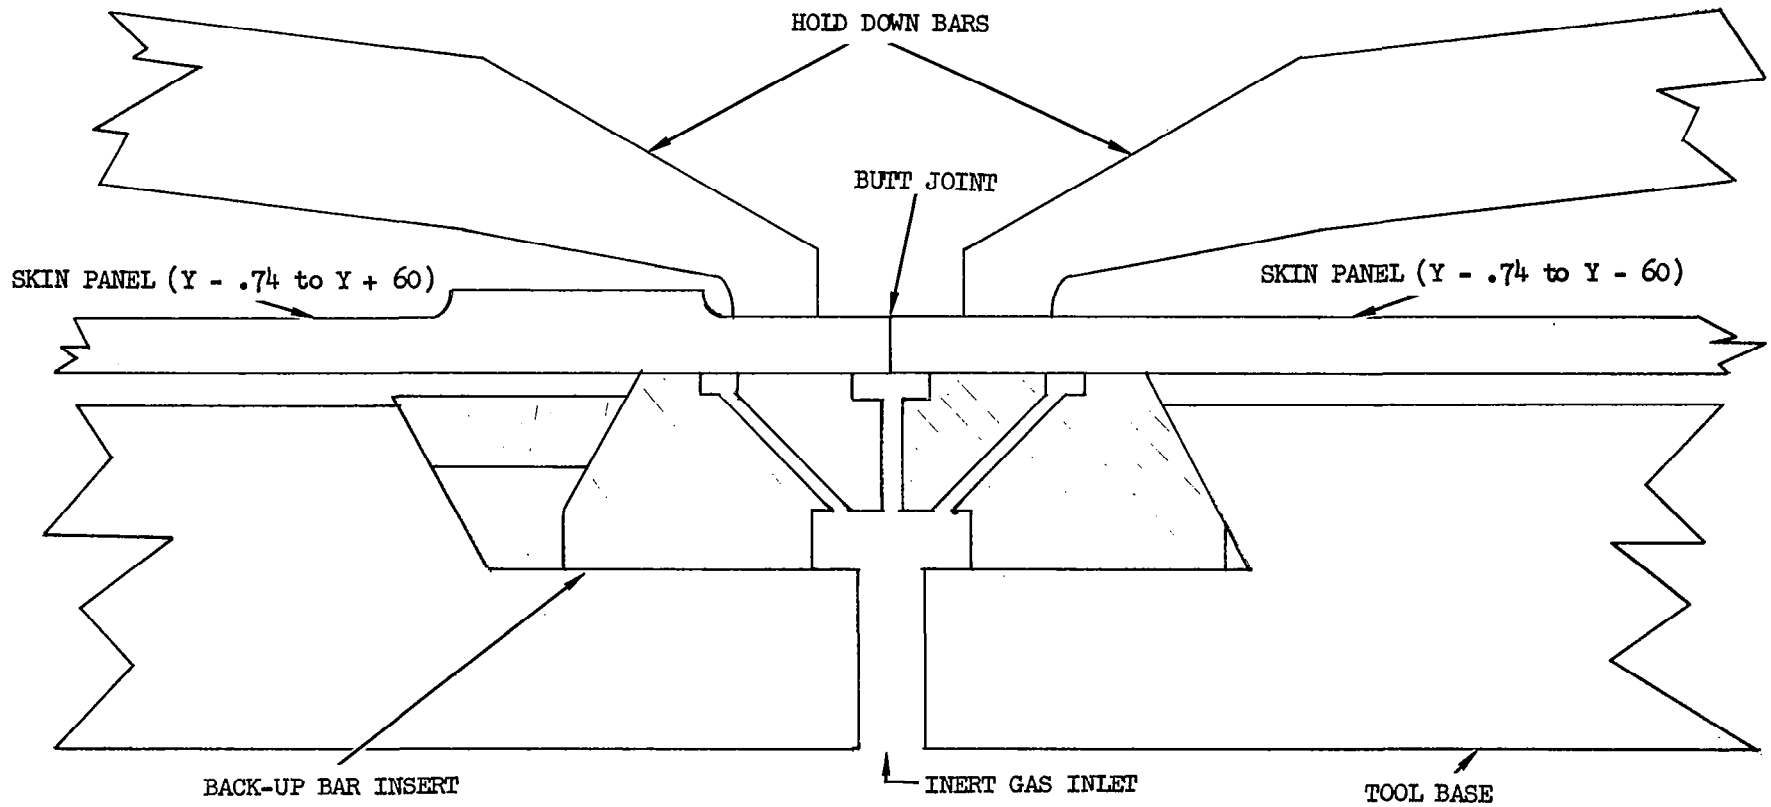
Schematic Drawing of the Fusion Welding Tool for Skin Panel Joining
